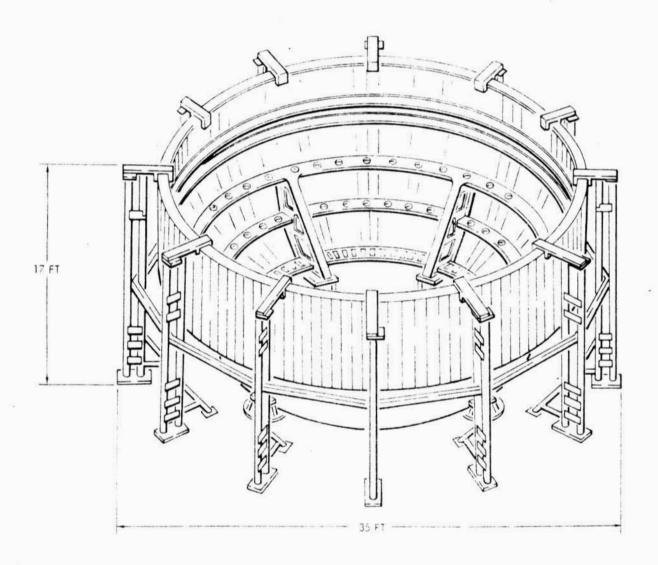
Thrust Structure and Aft Skirt in Assembly Fixture
